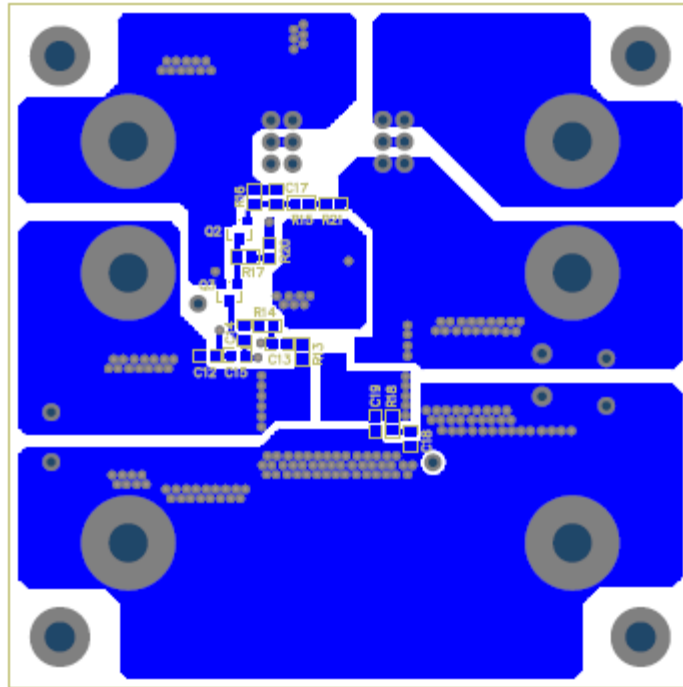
BOTTOM LAYER (COMPONENT SIDE MIRRORED)
